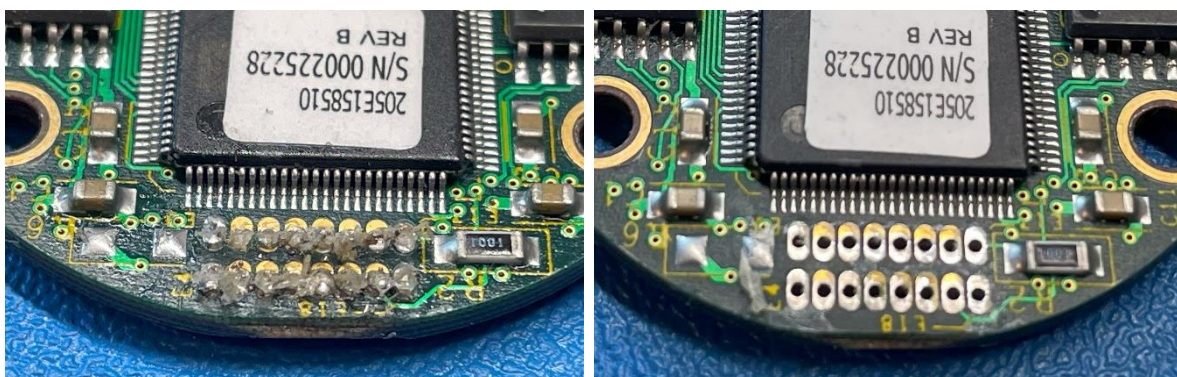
Removal of the remaining cable assembly. (Left): Before. (Right): After.
